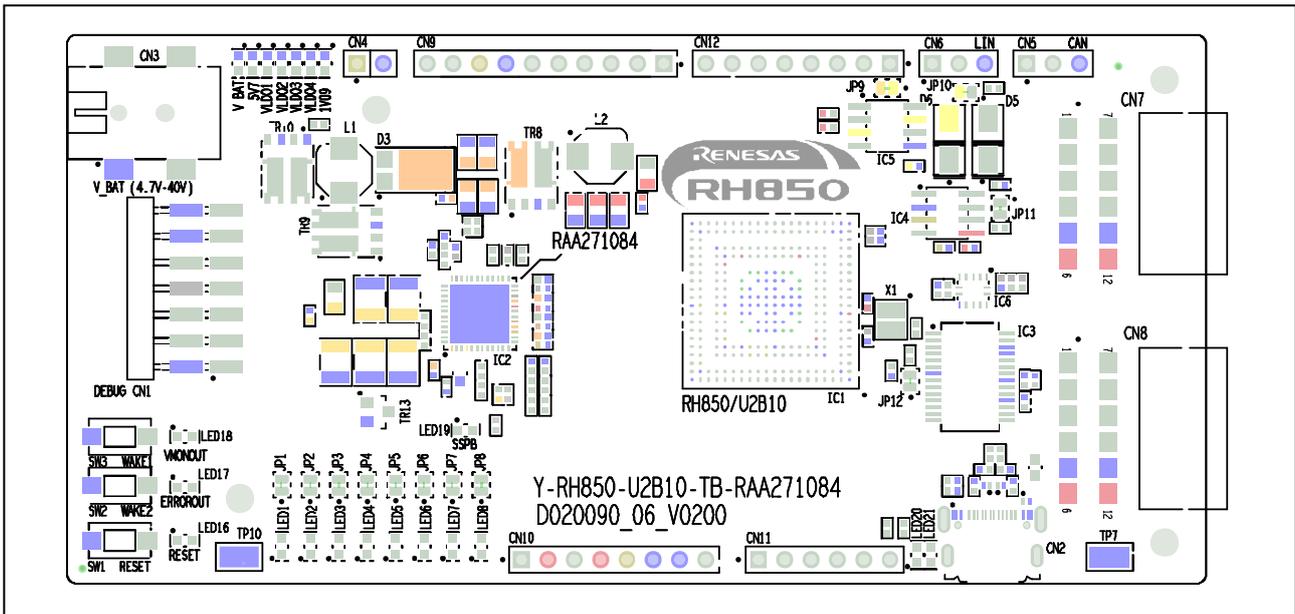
RH850/U2B10 target board with RAA271084 PMIC top view for board version D020090_06_V02
